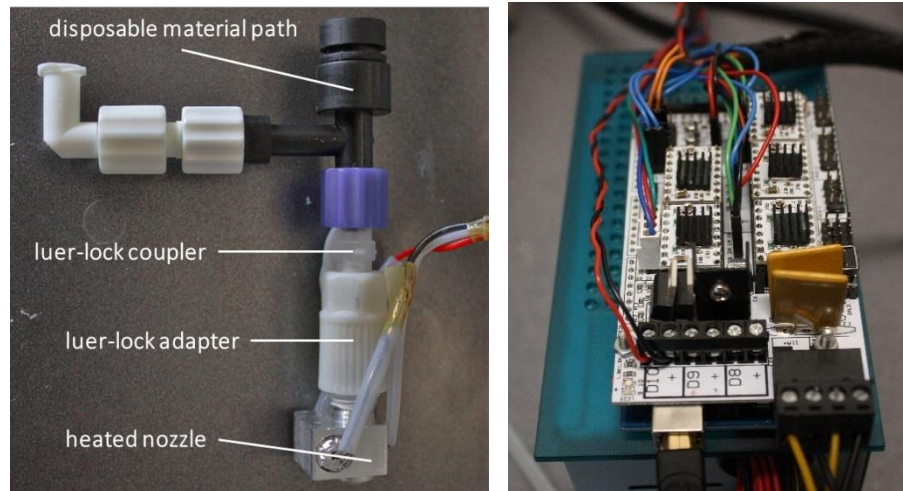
Left: DMP and J-Head hot end assembly, Right: RAMPS 1.4 control unit.
